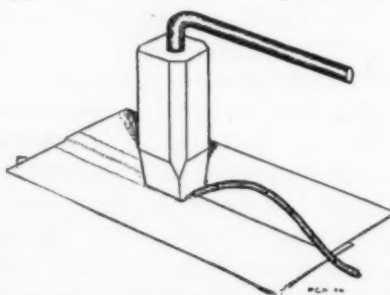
A Desirable Iron Shape for Seam Work and Correct Solder Application
